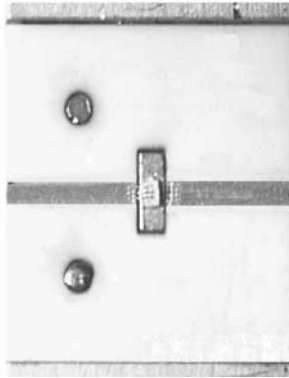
Test carrier with 2.5-pF shunt-mounted capacitor (board size 7 mm × 6 mm).
